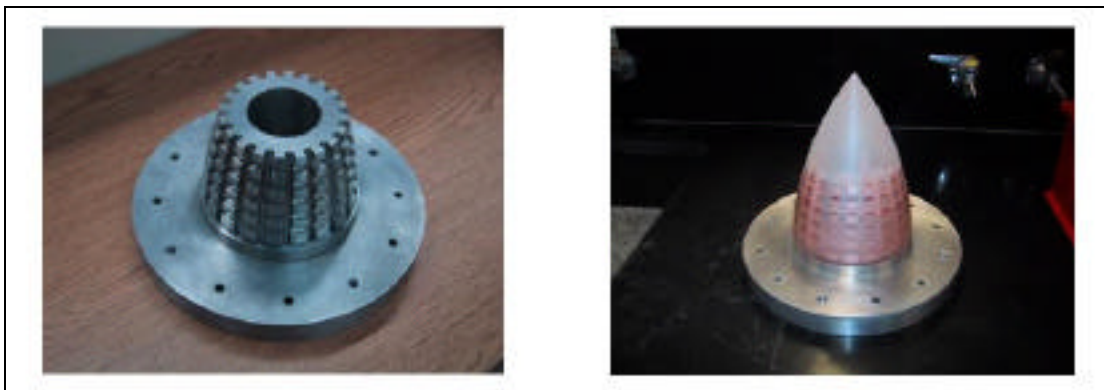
Blocking fixture for the convex surface processing, and dome mounted to fixture.
